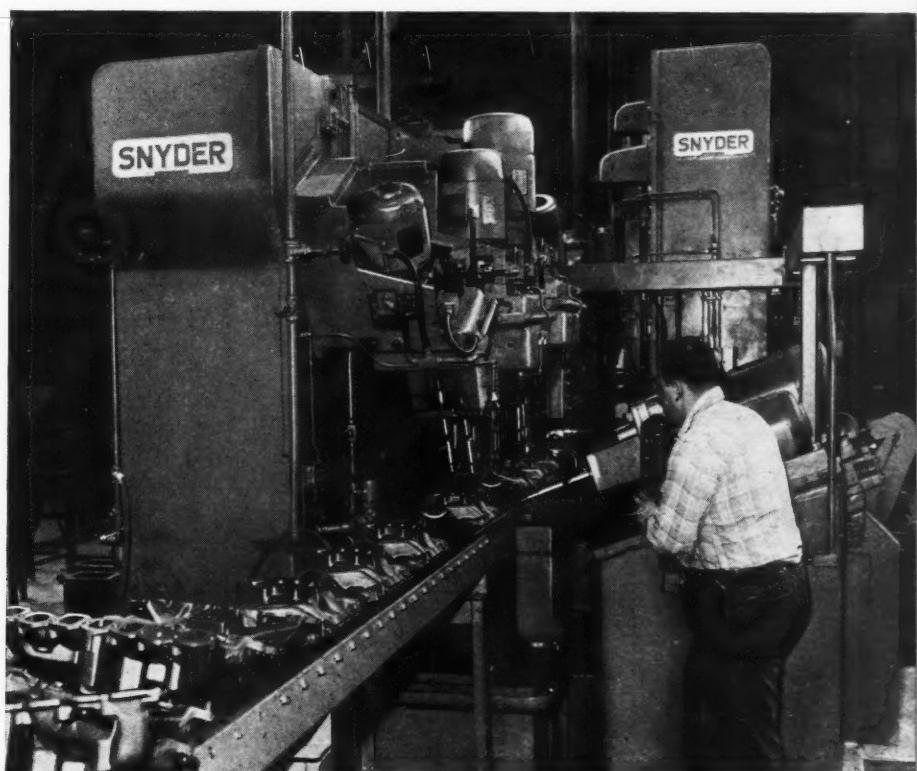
Twenty-two-station transfer machine, equipped with eighty-nine tools, drills, mills, taps, and reams cast-iron intake manifolds
